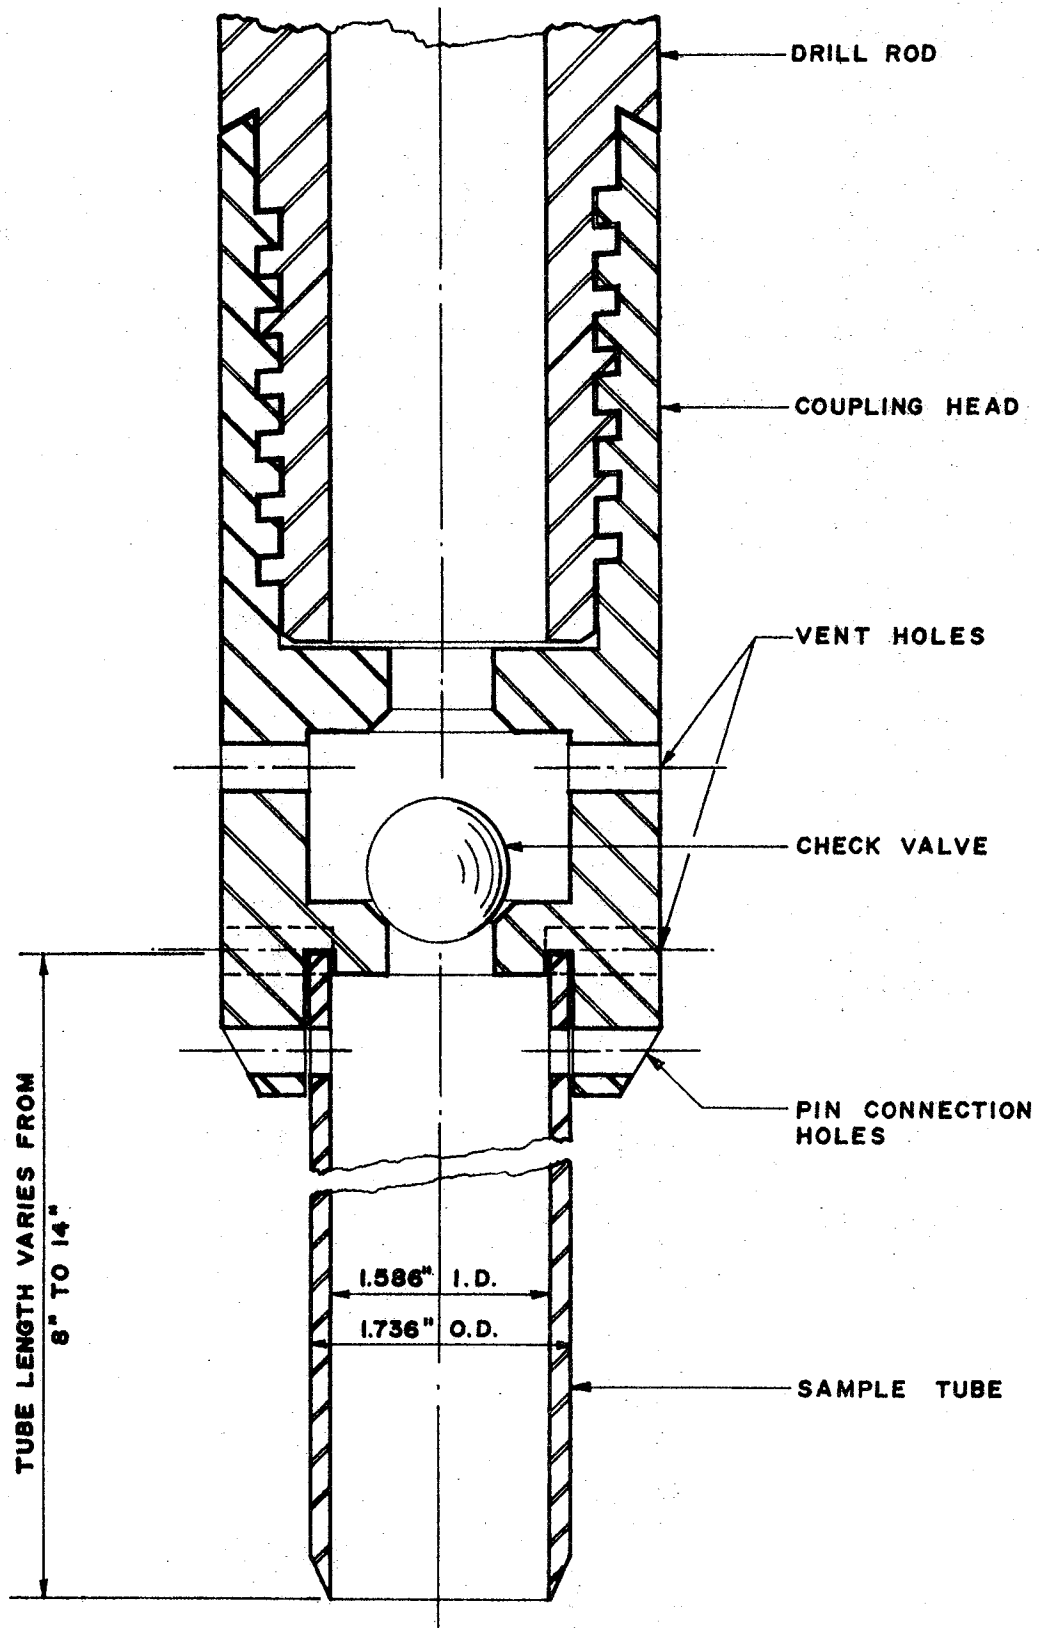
CROSS SECTION OF SAMPLING APPARATUS.
